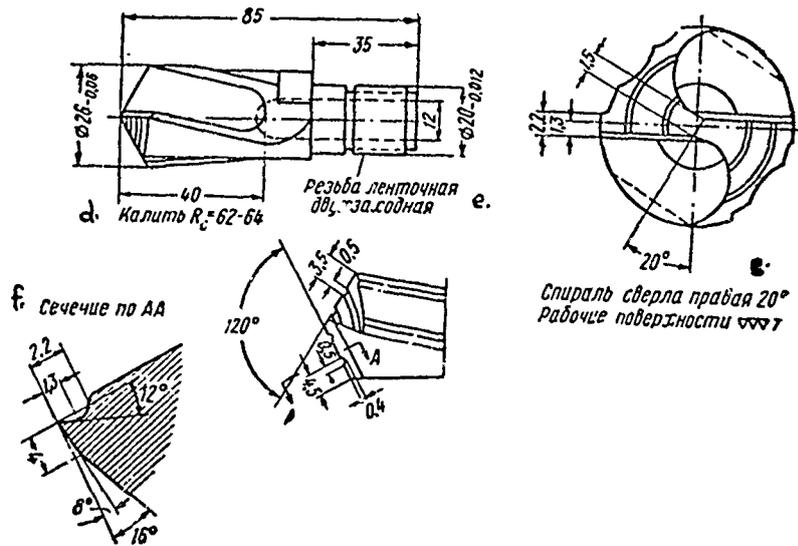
Spiral drill with two cutting edges and internal shavings exhaust
